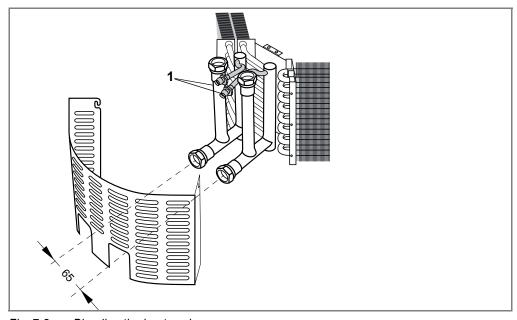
Bleeding the heat exchanger Pos. 1: Bleed screw
